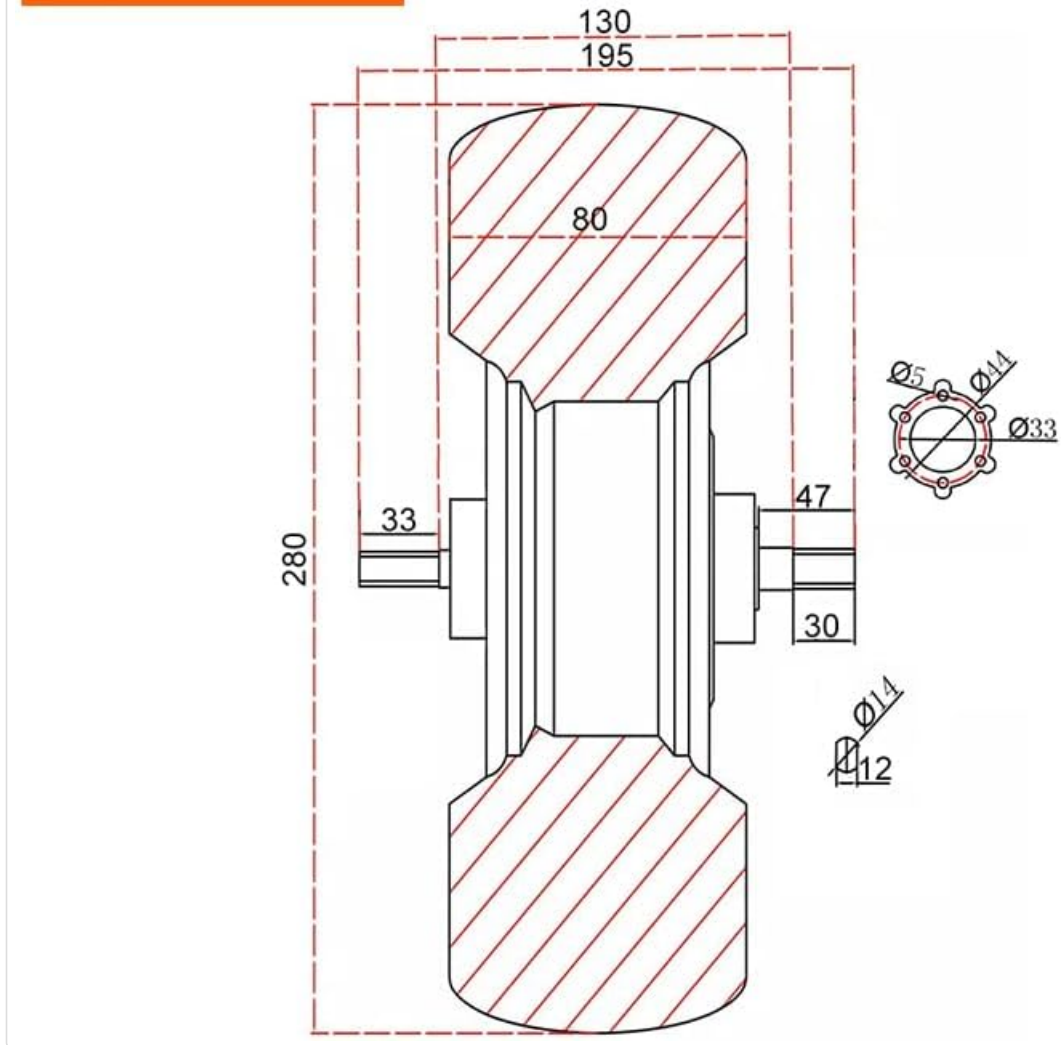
Technical drawing providing detailed measurements and cross-sectional views of the motor wheel. This diagram is useful for precise integration and understanding the physical characteristics of the motor.
